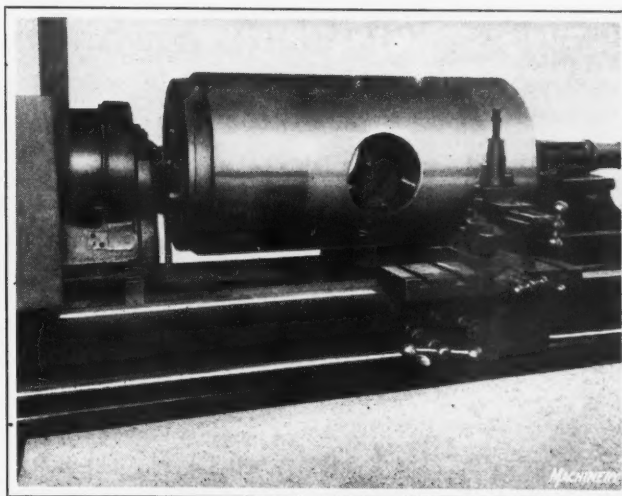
Lathe equipped with Relieving Attachment for turning Clearance Spaces around Wrist-pin Holes
